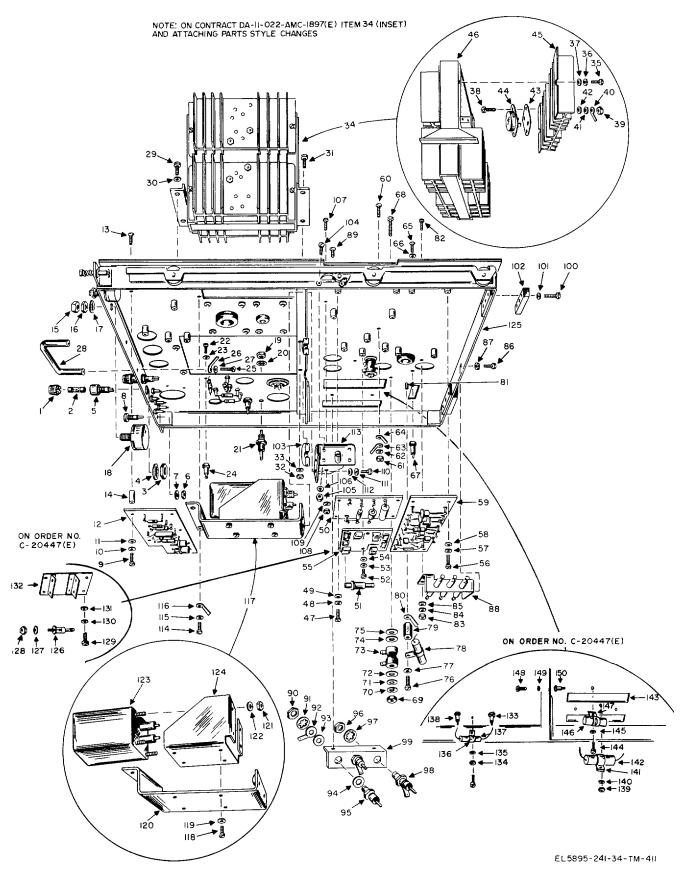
Power Supplies PP-2803/FSW-8 and VIP-2603A/FSW-8 (part of OA-2055/FSW-8 and OA-2055A/FSW-8), drawer lower section, exploded view.
